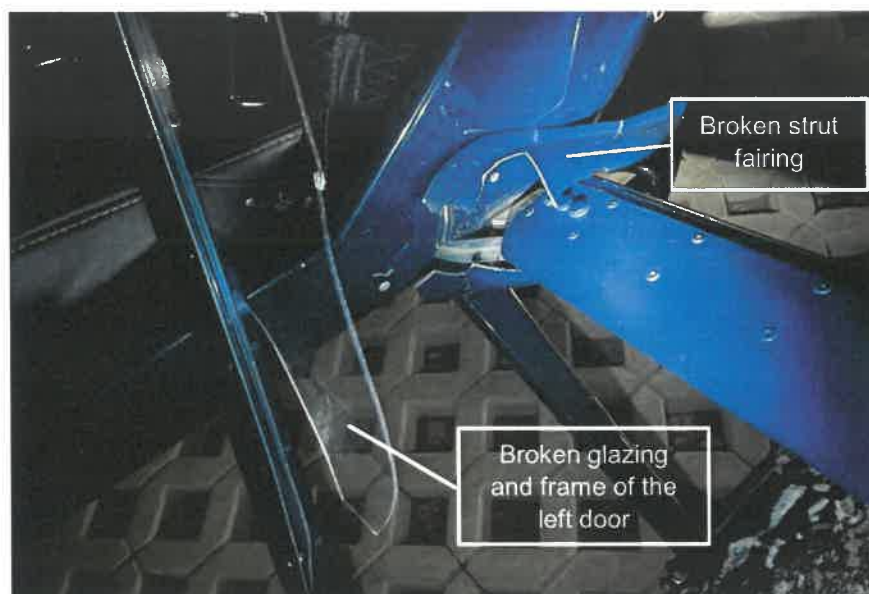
Damage to the left cabin door and strut fairing [source: SCAA]
